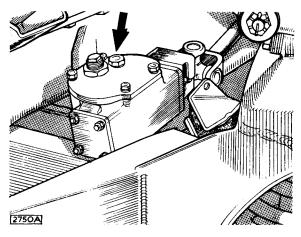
Steering Box Filler Plug (L.H.D.)
